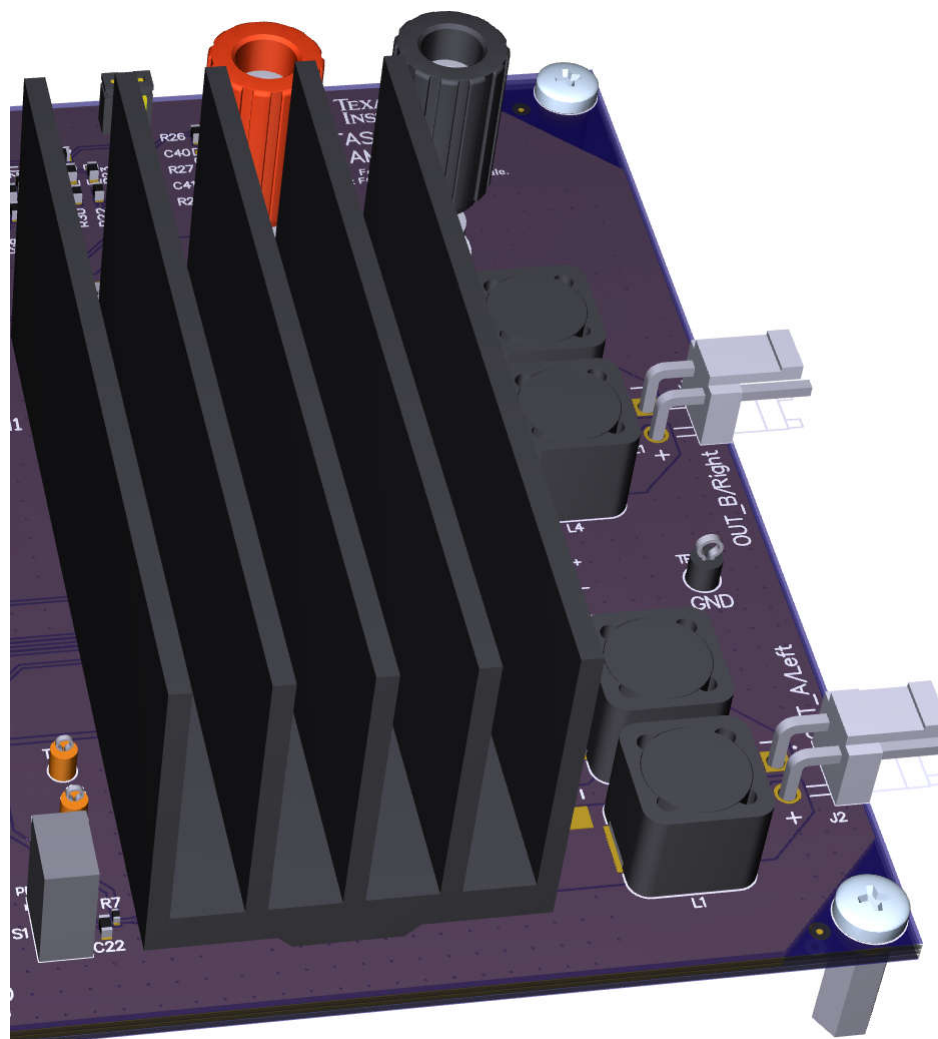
2.0 (Stereo BTL) EVM 3D Top View with Heatsink
